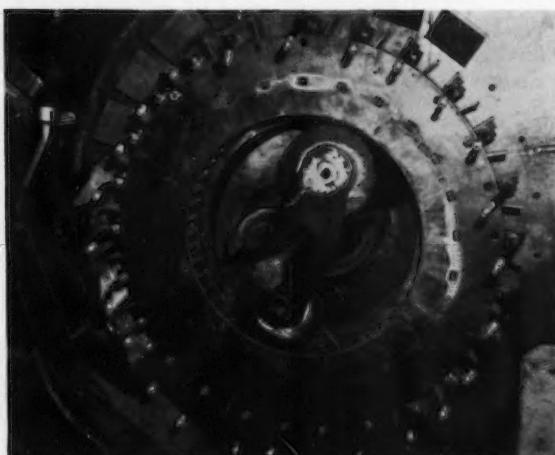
End view of the open-type wafering die with working parts. (The steel plate separating the wafering chamber from the extrusion chamber has been removed)
